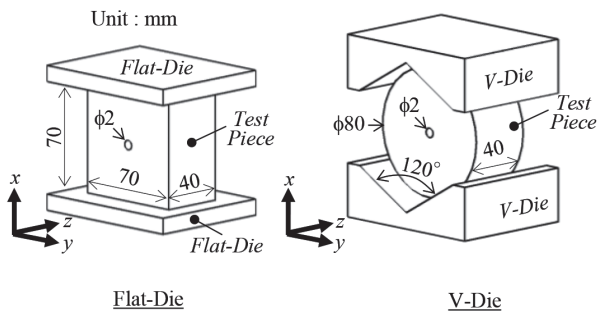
Schematic illustration of dies and test pieces of the forging test
